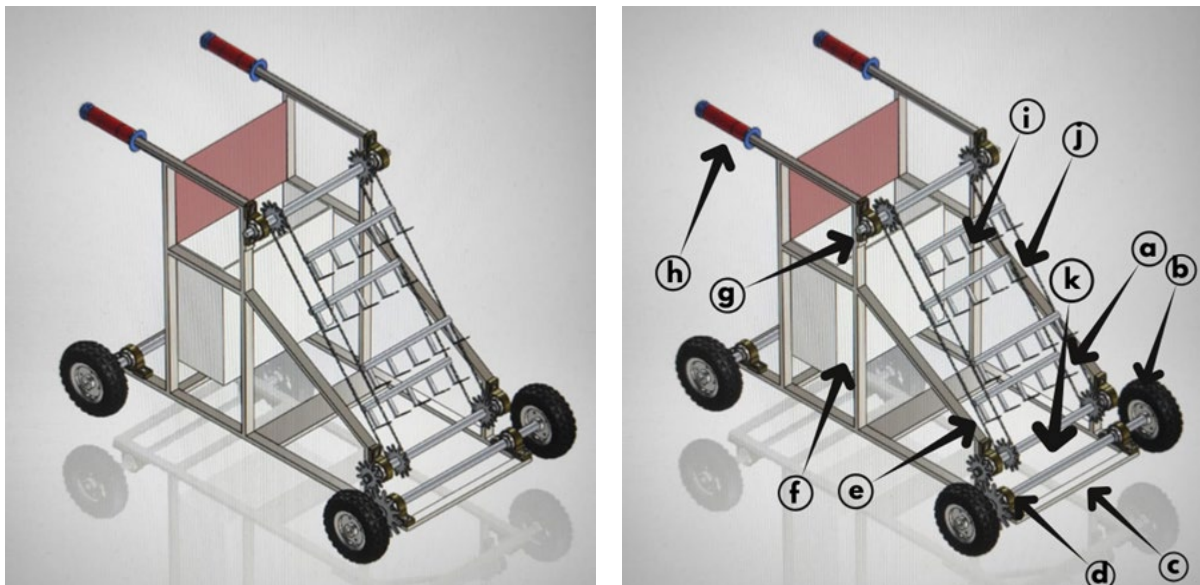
Beach Cleaner Crab Machine SolidWorks drawing
